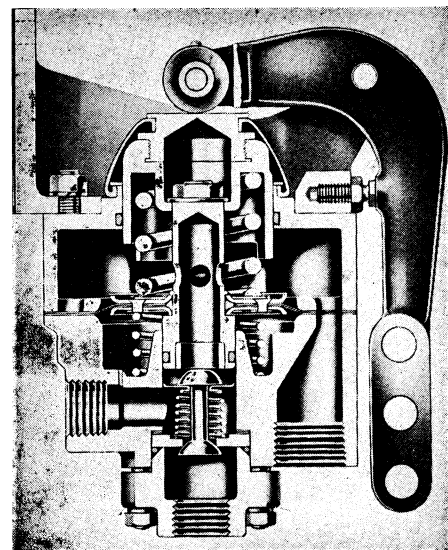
Sectional view of Type D-1 Lever-Operated Brake Valve
